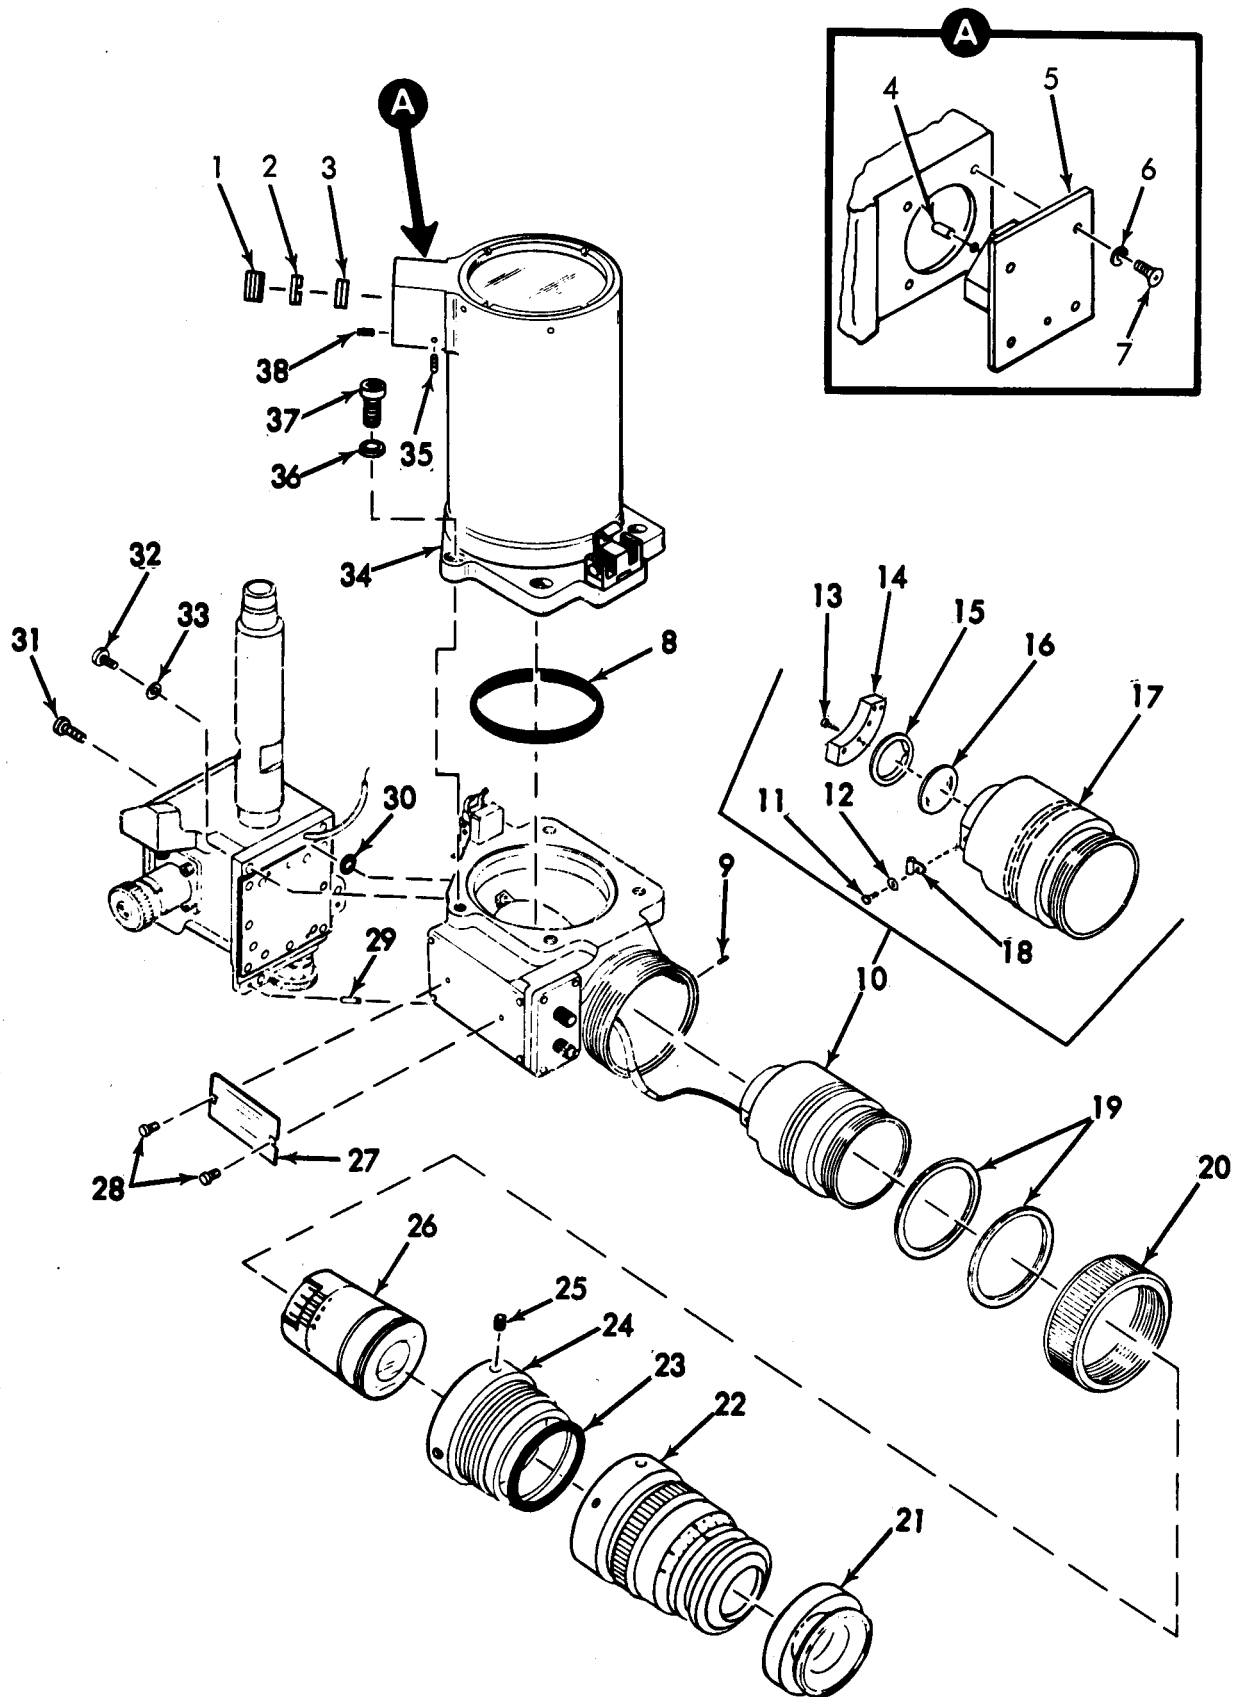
Elbow assembly (passive) 11733401 and Adapter assembly 11733480
